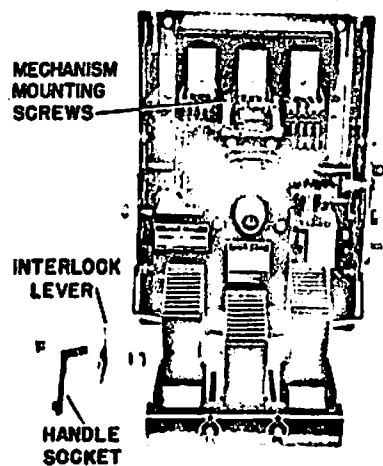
Arc Quenchers and Handle Socket Removed from Drawout Breaker
